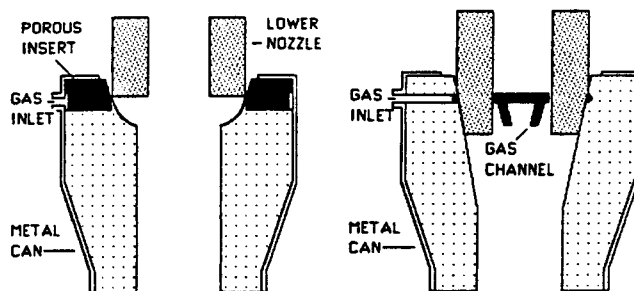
Example of argon seal between the ladle nozzle and ladle-to-tundish shroud.
